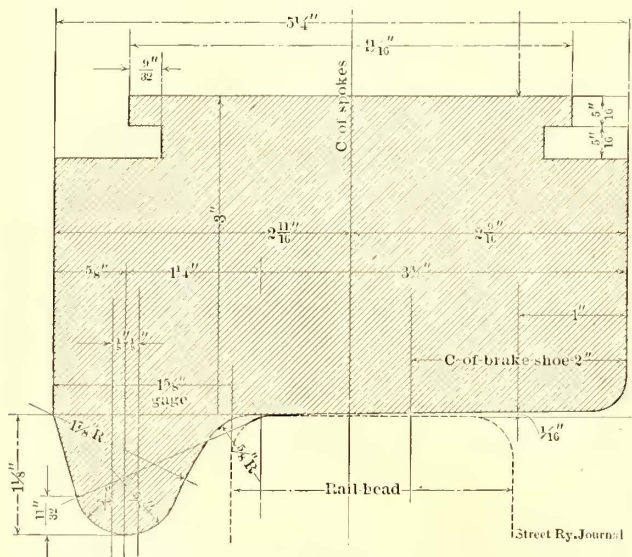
SECTION OF MOTOR WHEEL STEEL TIRE
